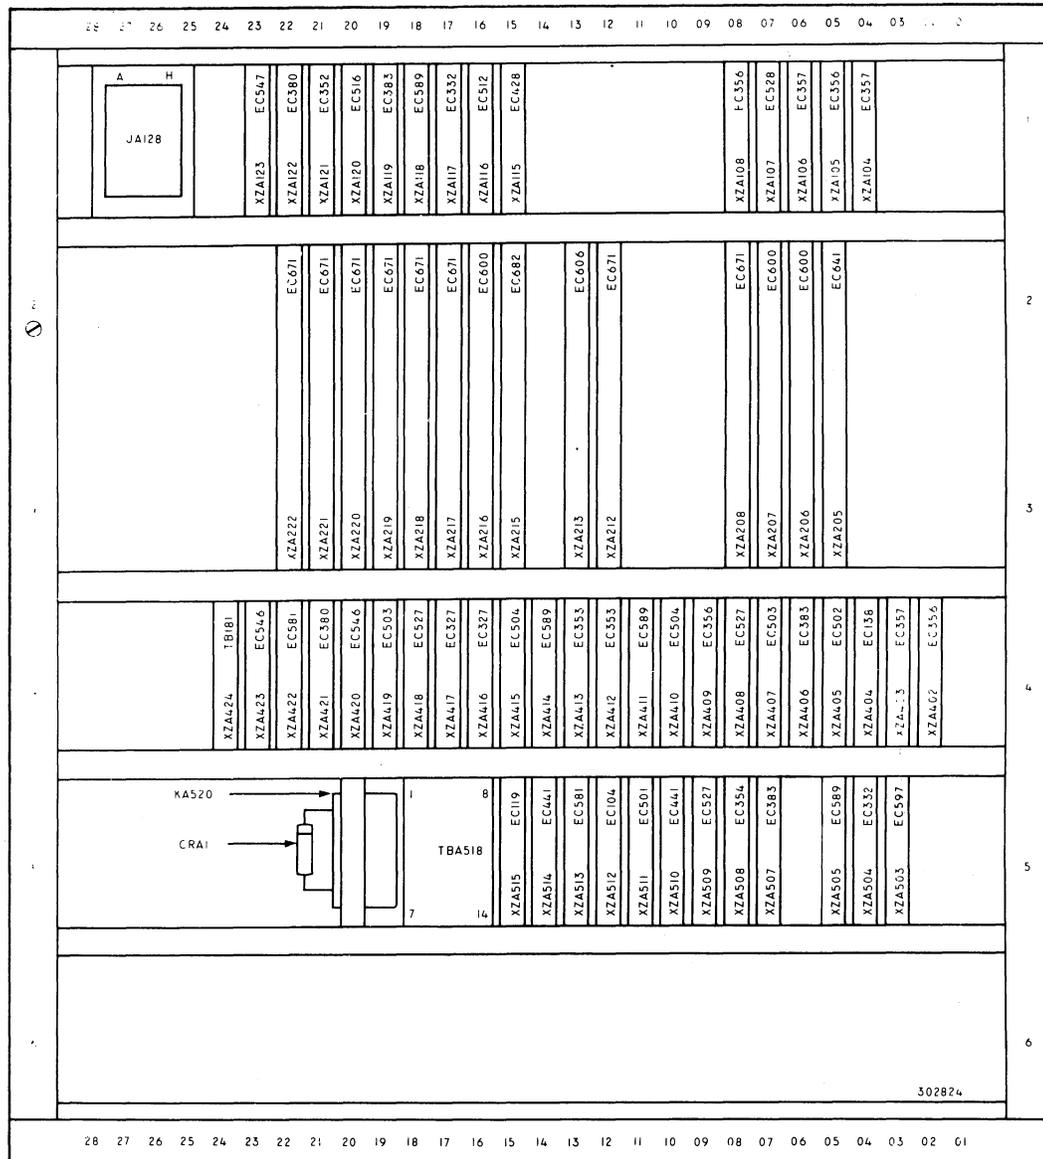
HSEDC Transmitter Control, Module A, Left Side View
